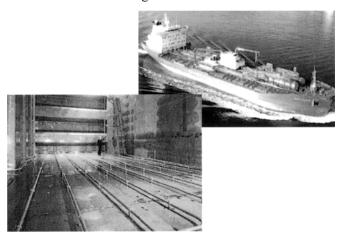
An application of DW-316LP: welding a storage tank (above) of a chemical tanker (top) with full penetration in all positions.
